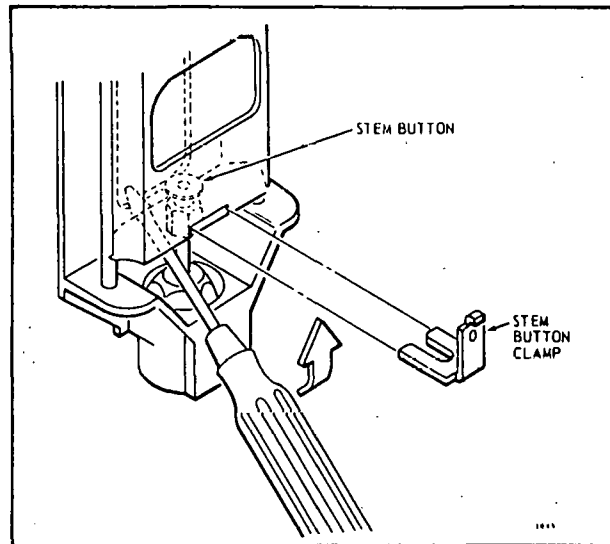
THE STEM BUTTON CLAMP FASTENS THE VALVE STEM TO THE LINKAGE SLIDE MECHANISM.
